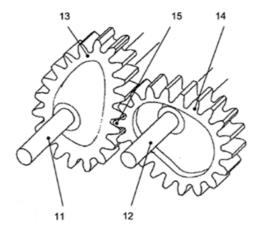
illustrates a toothed gearing including two non-circular gears (13) and (14).
